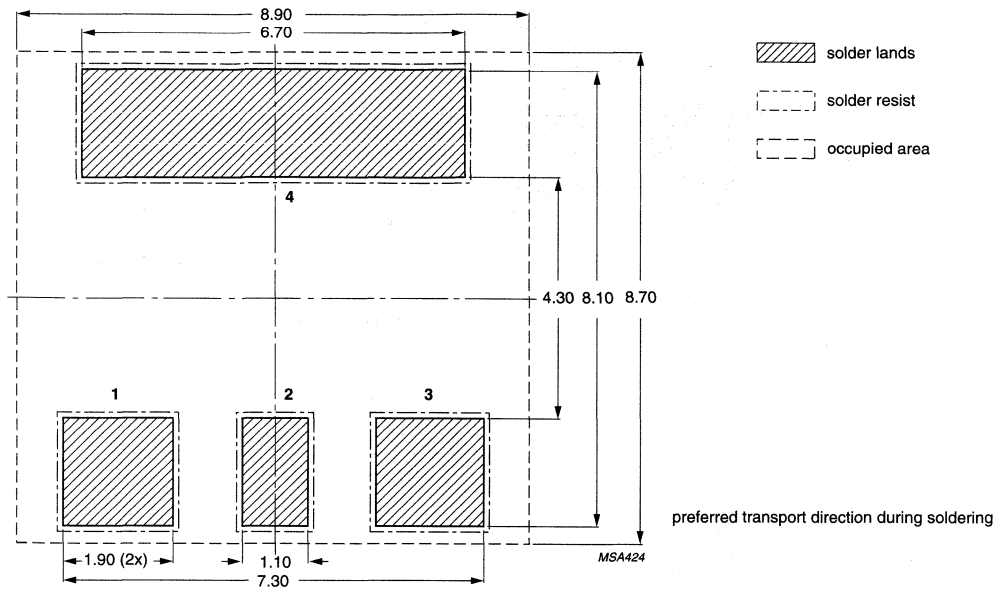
Wave soldering footprint for SOT89: typical dimensions.
